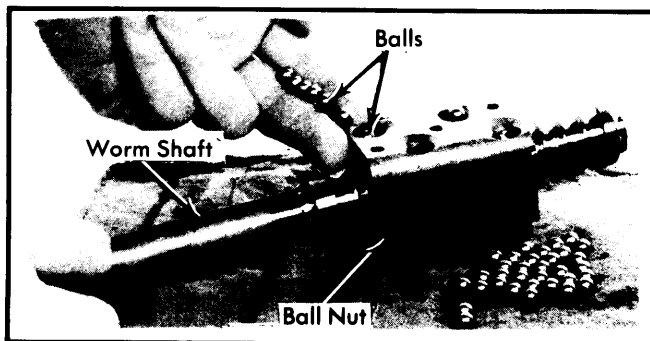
Filling Ball Circuits Through Holes in Ball Nut
